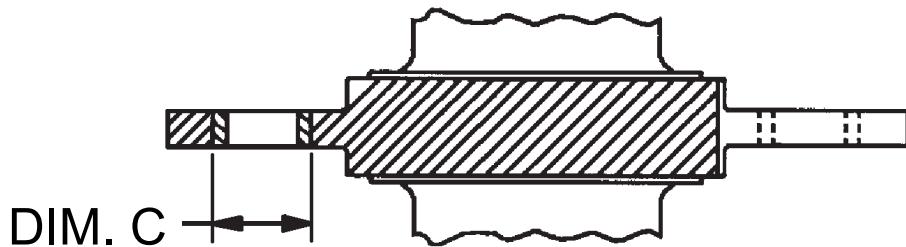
Crankshaft Hanger Blade Bushing Bore
